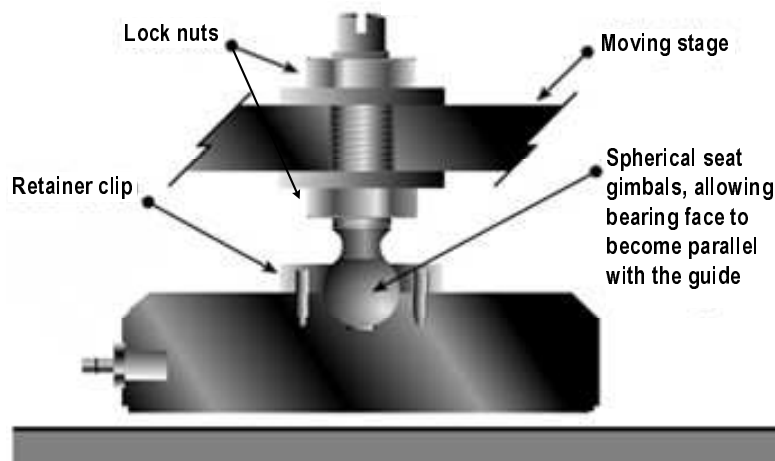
Aerostatic Bearing Mounting Mechanism (Source: <http://www.newwayairbearings.com>)
